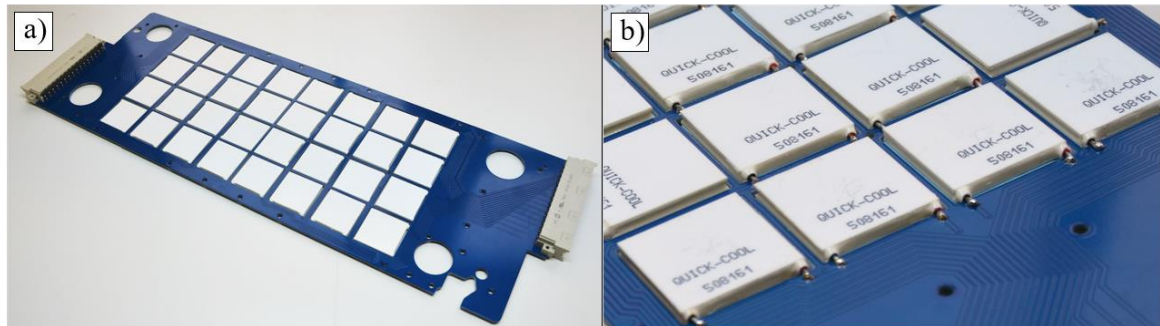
(a) the overall view of the assembled anode power-unit PCB, as well as (b) the magnified view, in which the solder joint of the respective grid and Peltier element can be seen in figure.
